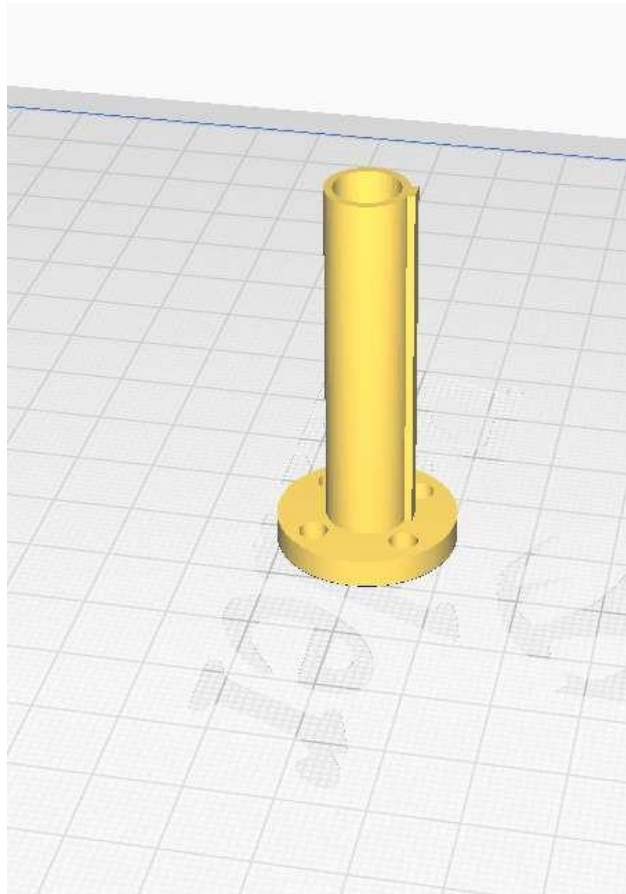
Adapter from gearbox to lead screw. Source: own
